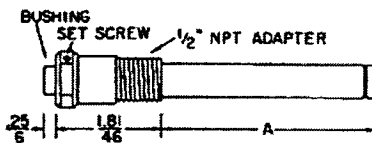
Part No. FTG13A-600R packing nut assembly. (Used with swaged bulb with support tube for direct immersion application.)
